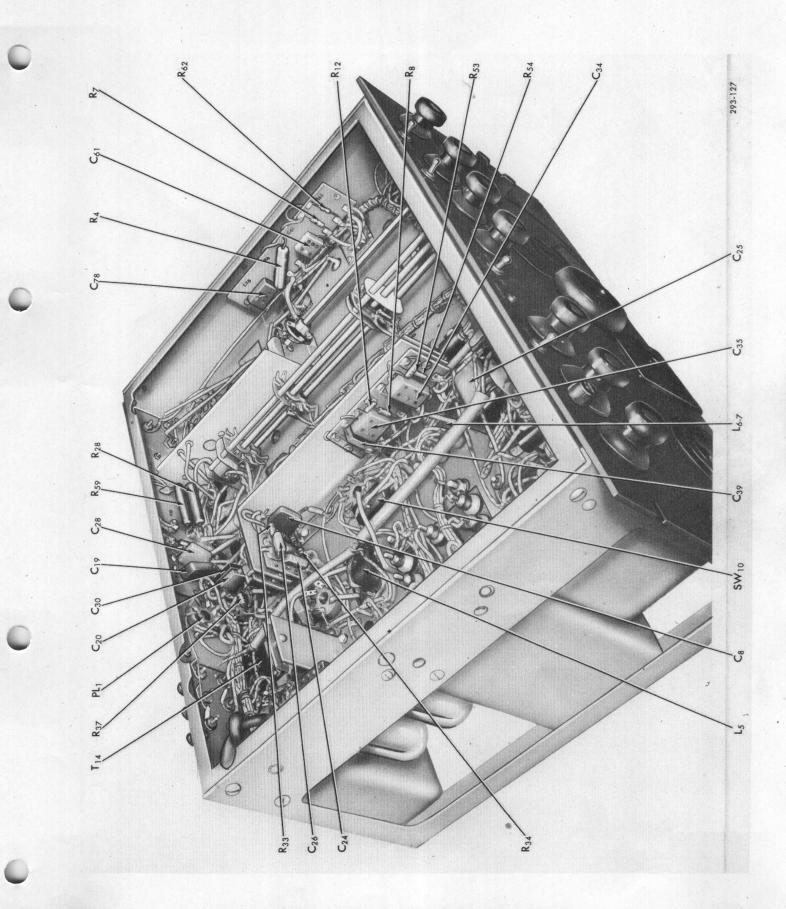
Bottom View of Receiver Chassis Looking Toward Rear.
